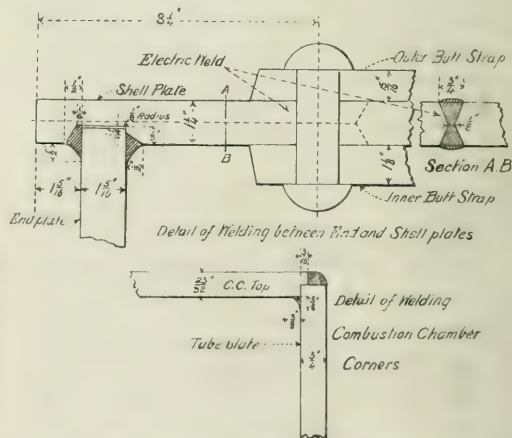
DETAILS OF WELDED JOINTS.
